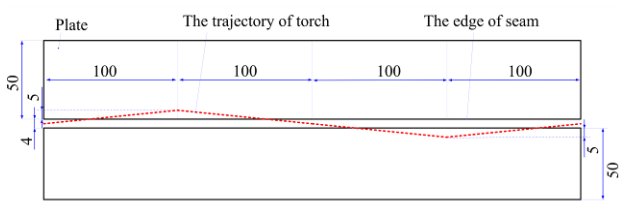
The size of work piece and welding torch trajectory (mm)
